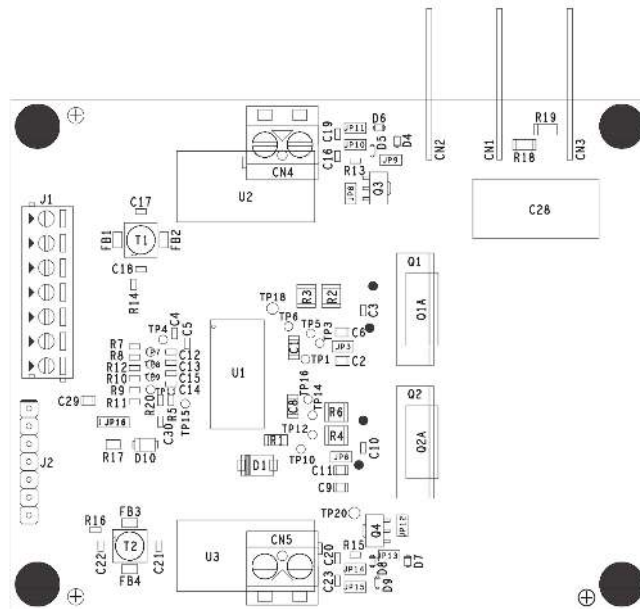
EVALSTGAP2SICD – Layout (component placement bottom view)
